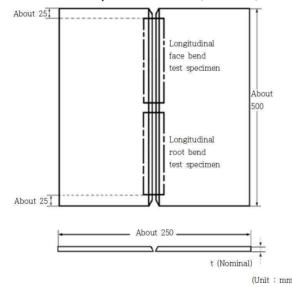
Dimensions and types of test assembly for butt welds(For 9%nickel alloys)
